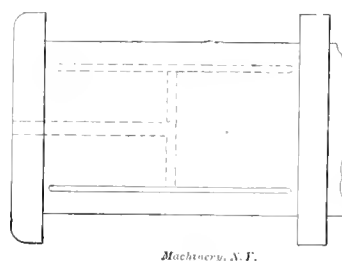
Crank-pin Bearing with Oil Grooves for a Vertical Rod.
